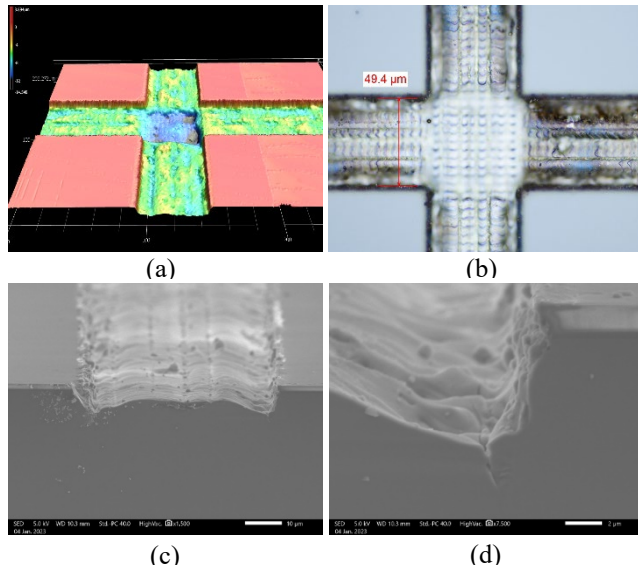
Inspection of UV-ns laser grooved material after coating removal shows a smooth, shiny bottom and maximum burr of 1.1  $\mu\text{m}$  with (a) confocal imaging and (b) optical microscopy. SEM inspection of a manually cleaved crosscut shows a groove profile (c) with a wide w-shape and zoomed in at the edge (d) a small vertical trench of about 2  $\mu\text{m}$  into the Si.
